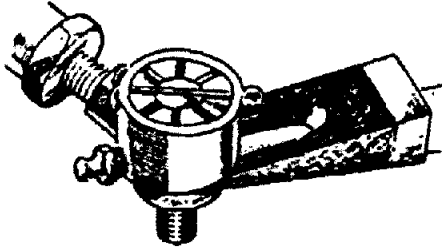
If a forked wedge is used to break the taper it should be driven in line with the drop arm to avoid forcing the rocker shaft round.
